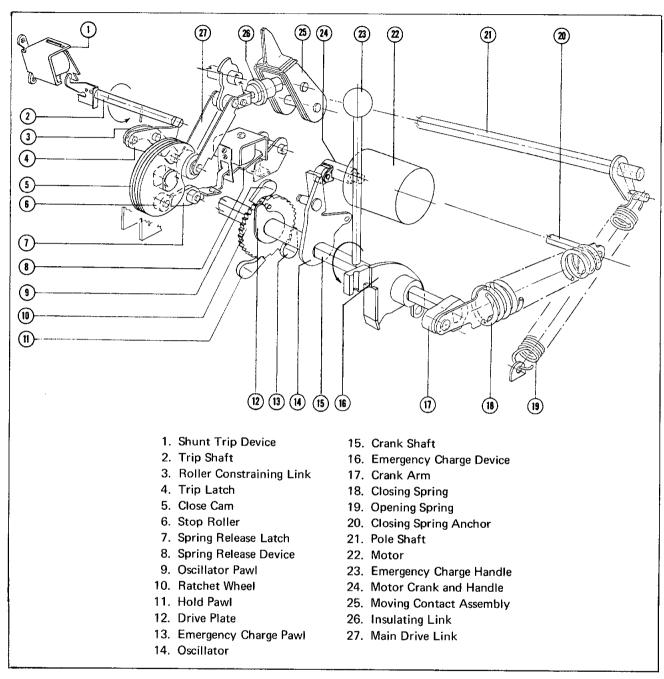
Arrangement of the Principal Parts of a Completely Power Operated Mechanism. The Close Spring is Shown in the Charged Position
